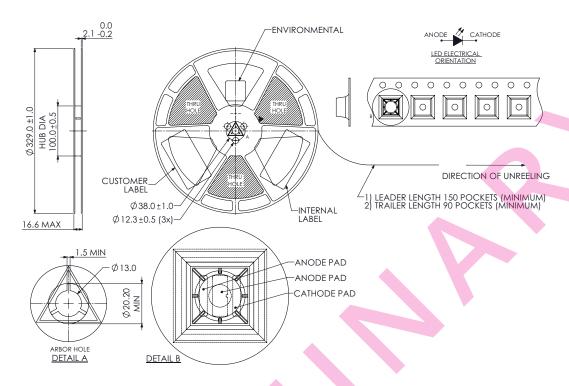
Reel dimensions for L1I0-0XXX060000000 and L1I0-0XXX090000000.
